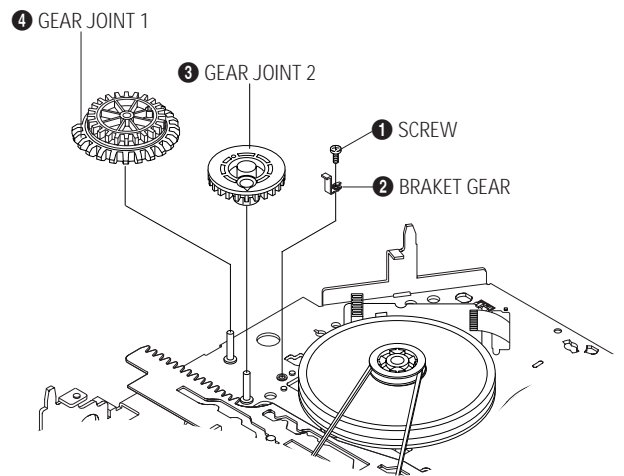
Bracket Gear, Gear Joint 1,2 Removal
